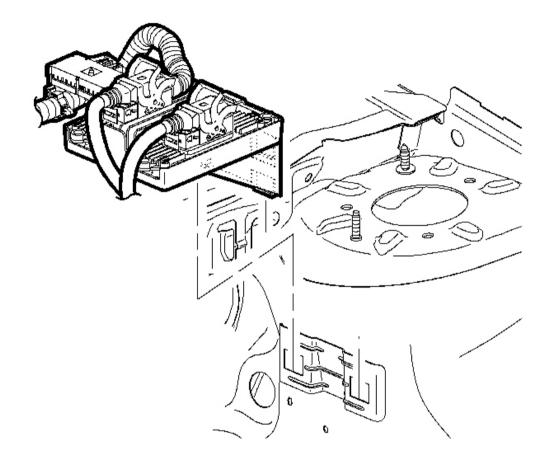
Removing/Installing Transaxle Control Module (TCM) Courtesy of GENERAL MOTORS CORP.
